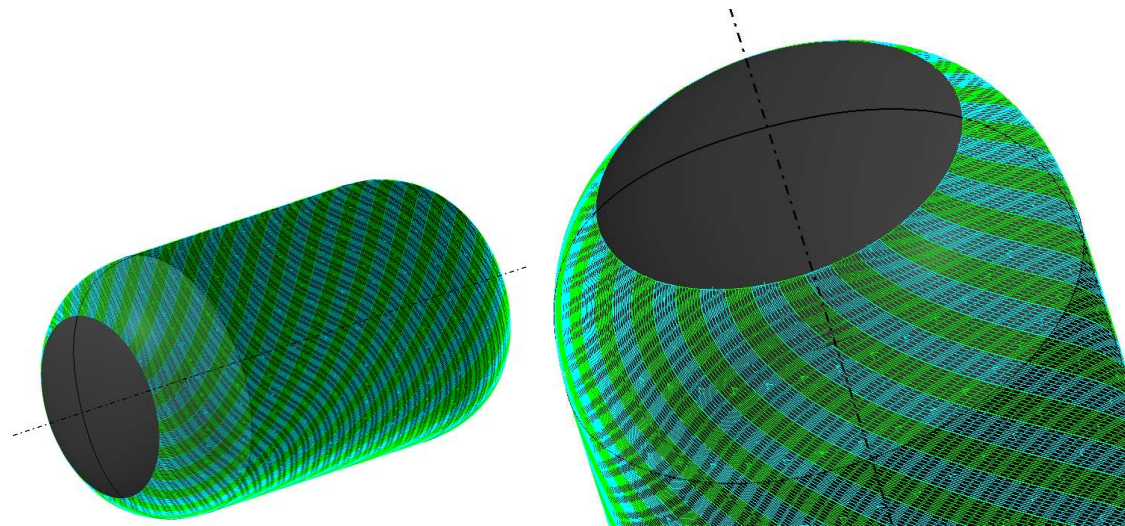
45° involute style layer; equator diameter 1000mm, polar opening 707mm
